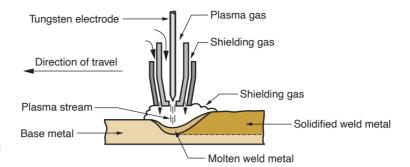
Plasma arc welding (PAW).
